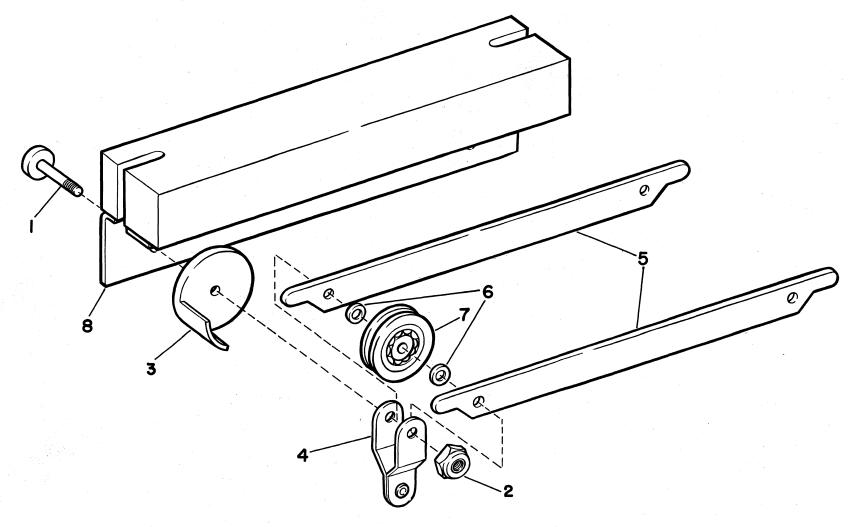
500 797 00 EQUALIZER ASSEMBLY-EXPLODED VIEW
